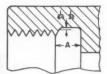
When a thread is to be cut on a thread miller using a single tool, a comparatively narrow recess may be used.
